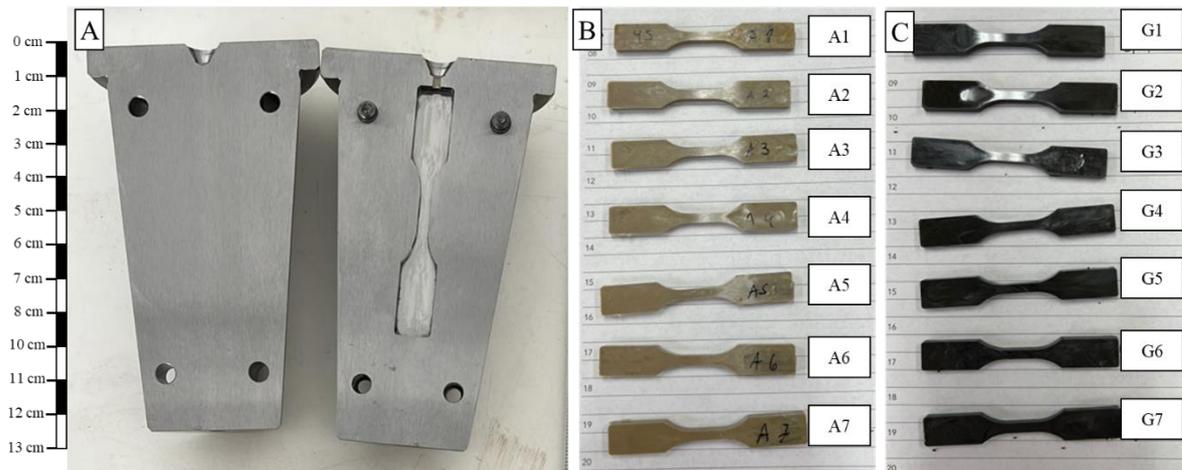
The mold used for injection molding (A) and the injected specimens (B).
